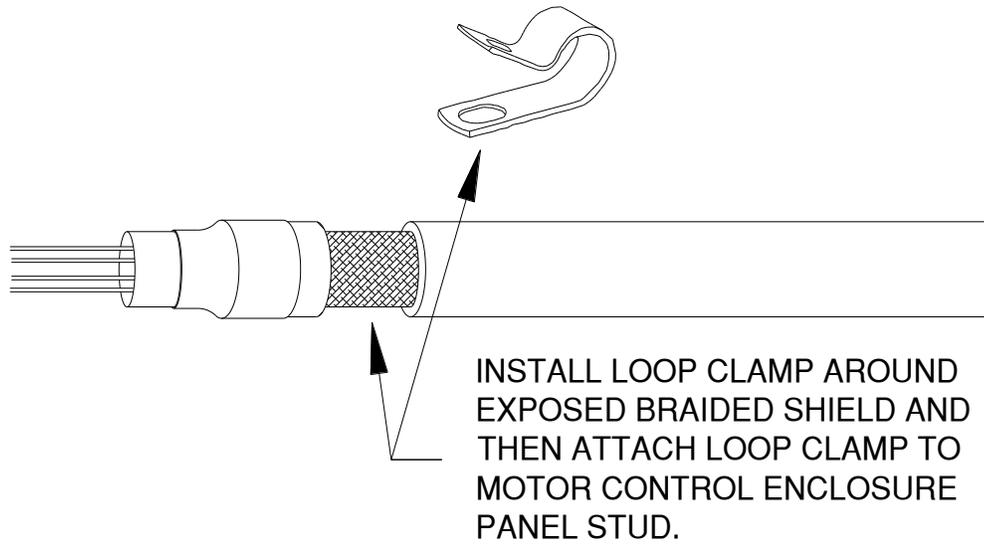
MOTOR POWER CABLE SHIELD TERMINATION
